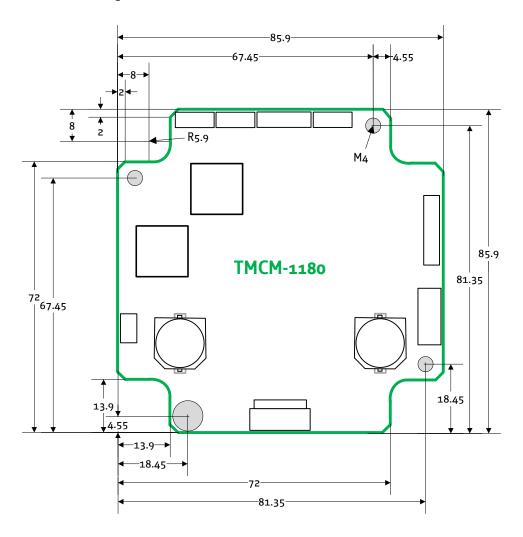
Dimensions of TMCM-1180 and mounting holes
